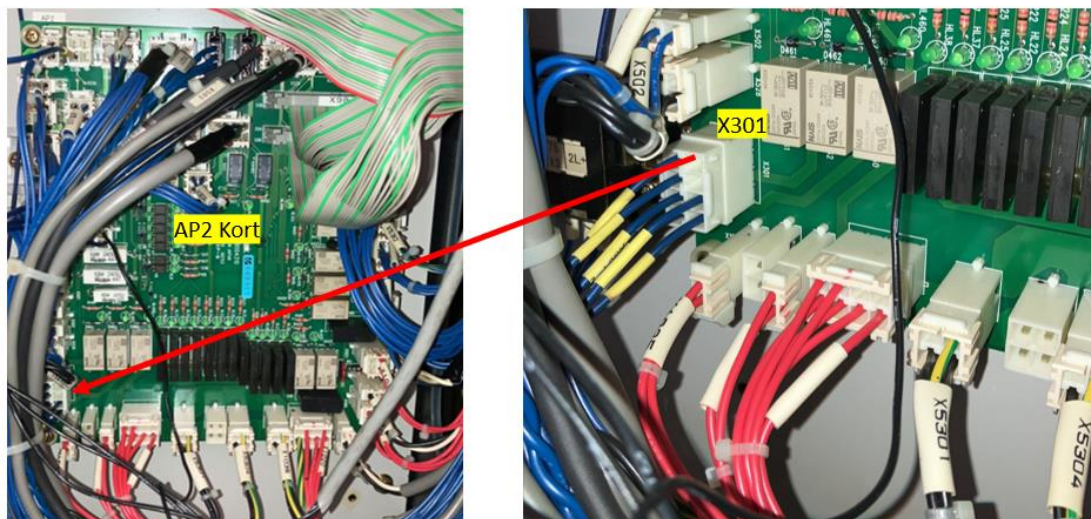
Wiring in Mazak CNC-Center where the Welding machine will be integrated.
